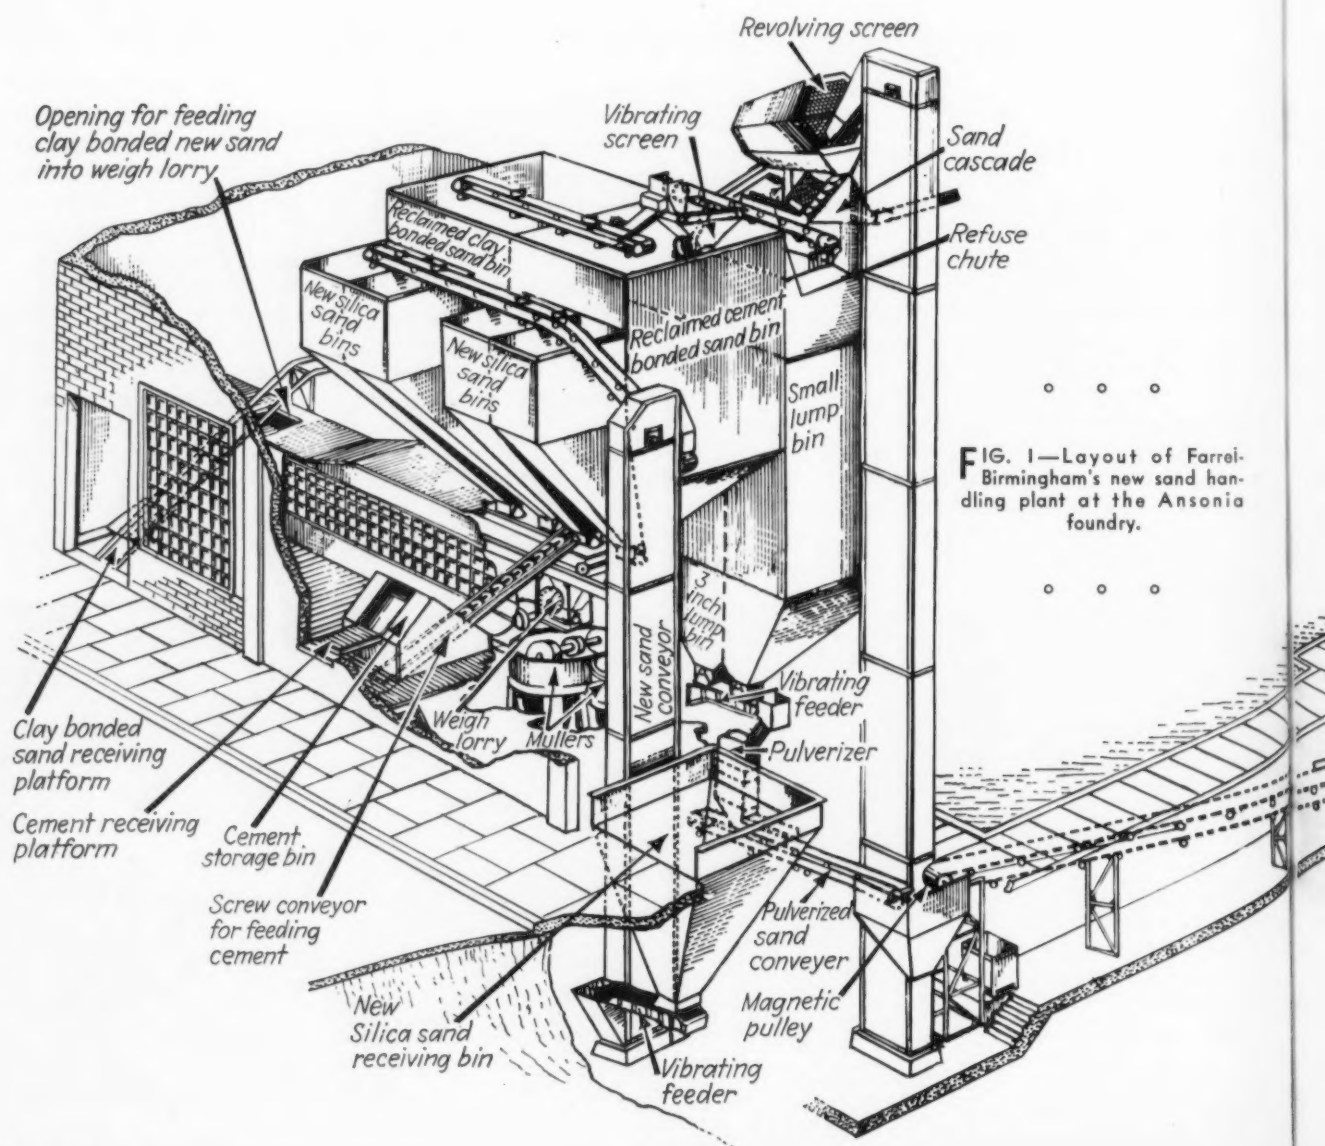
Layout of Farrel-Birmingham's new sand handling plant at the Ansonia foundry.
